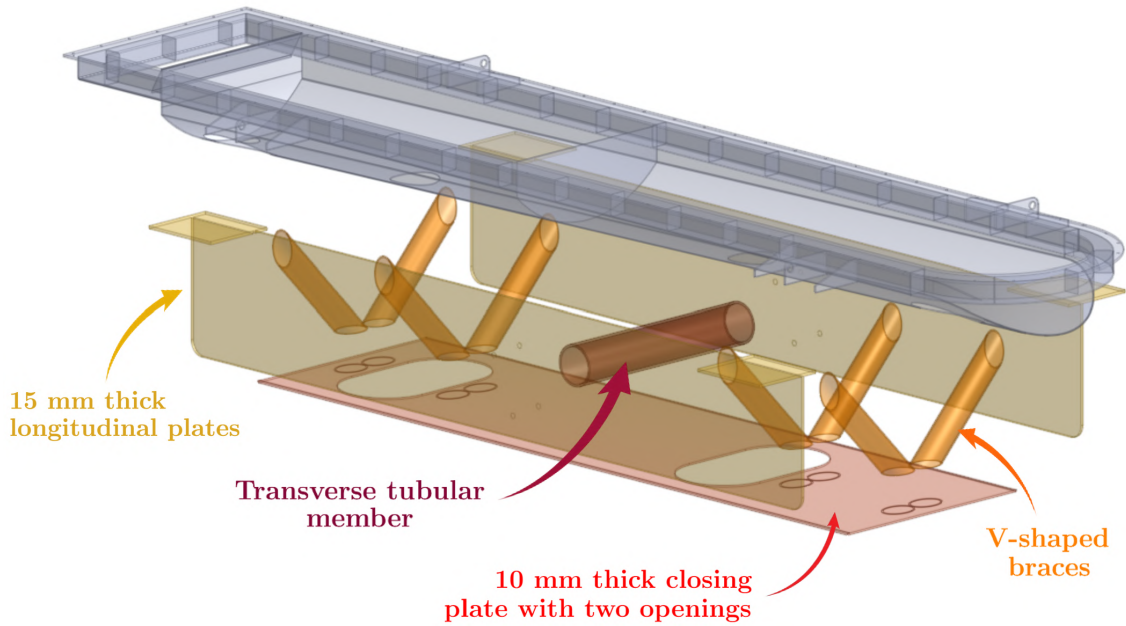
Exploded view of the layout of the re-designed supporting structure
